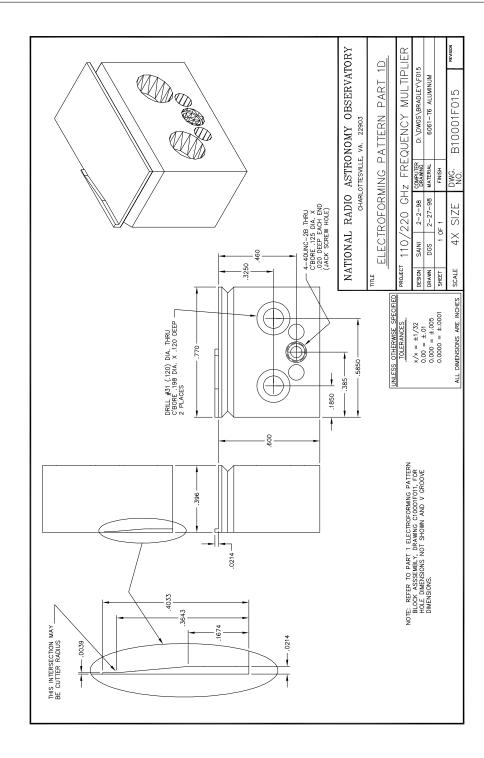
110/220 GHz frequency doubler: Mechanical details of the mandrel part 1D.
